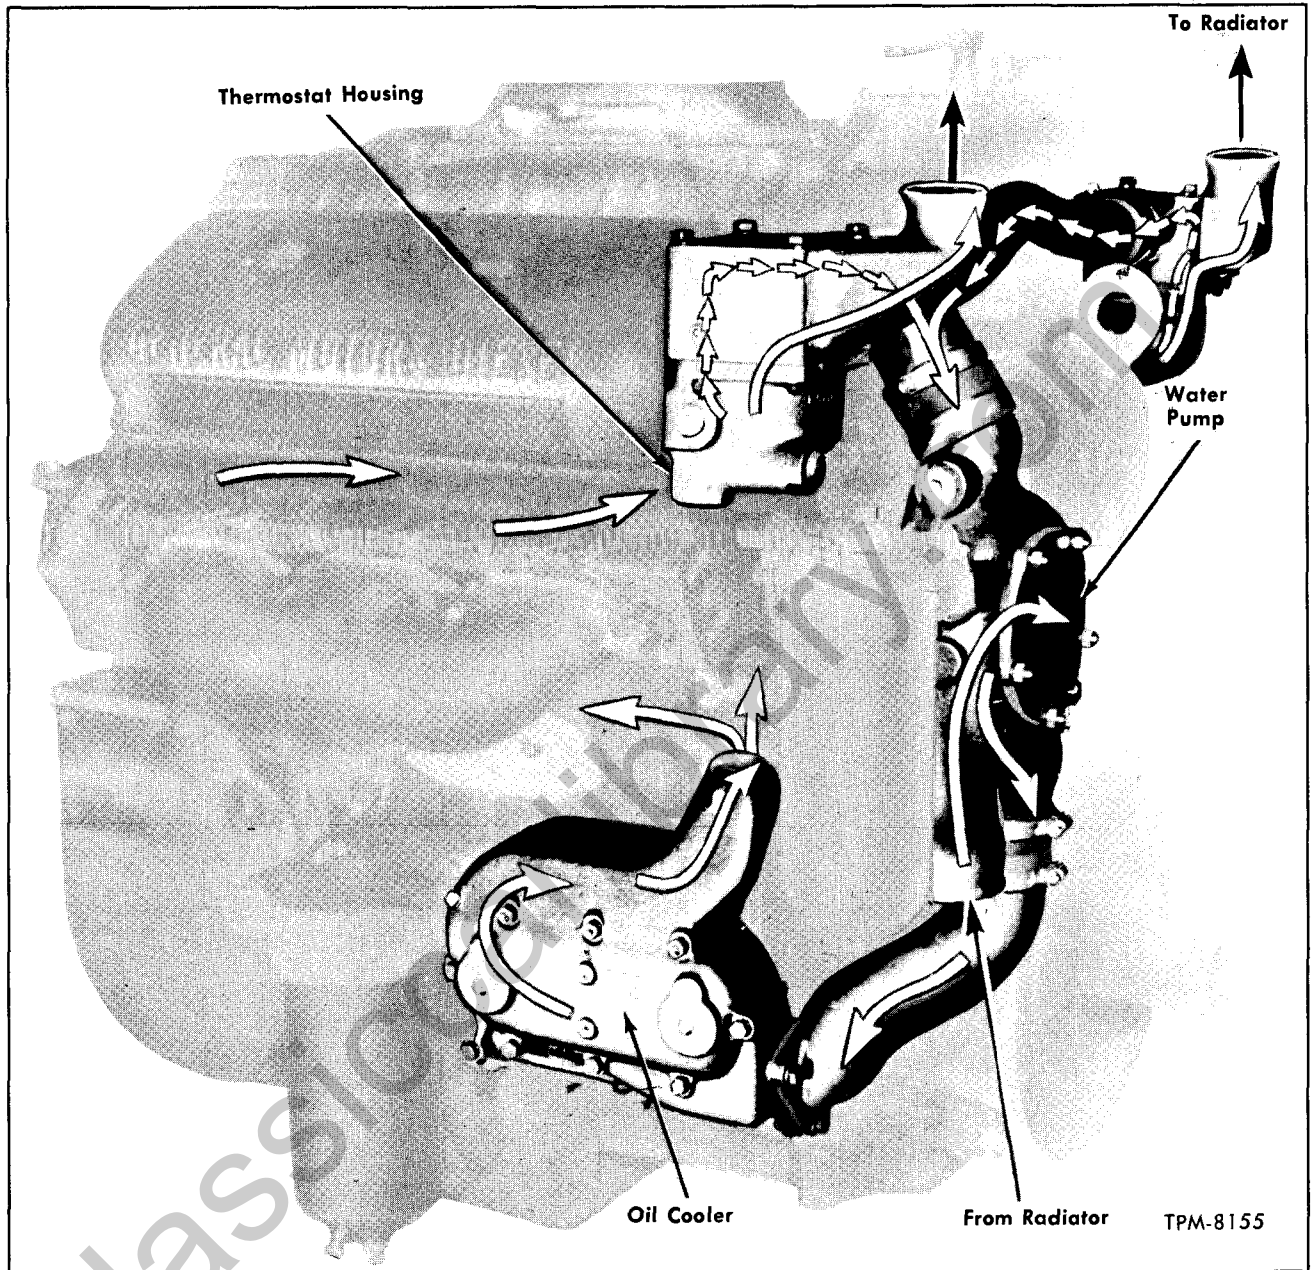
Coolant Circulation (8V-71 Diesel Engine)
